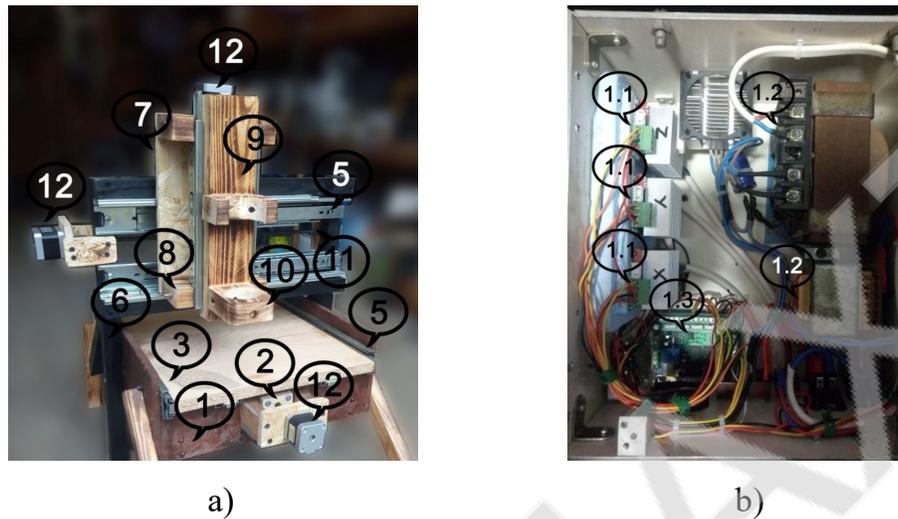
a) External view of the developed CNC machine tool b) External view of the machine control unit
